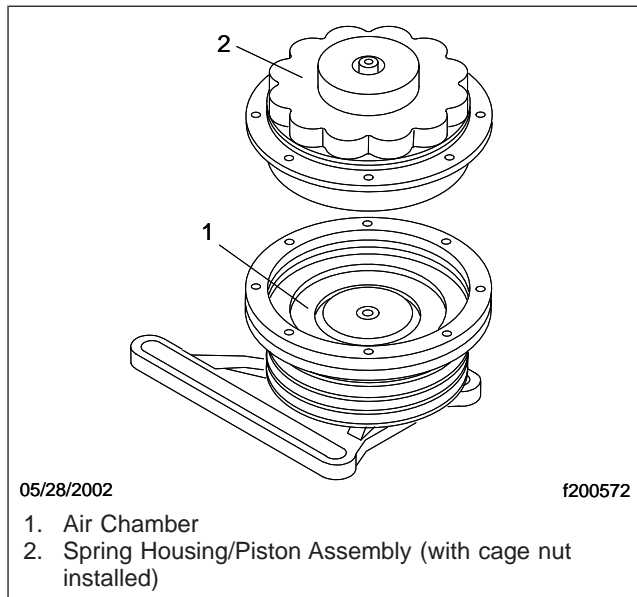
, Spring Housing/Piston Assembly Removal and Installation
